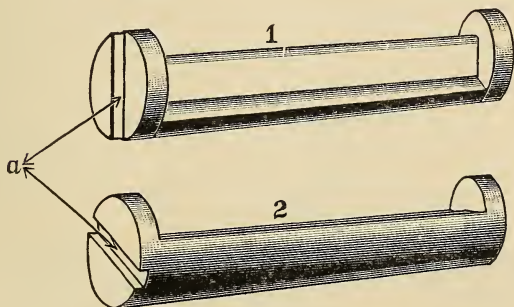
Corliss valves: 1, steam valve; 2, exhaust valve. The recesses *a*, cut across the face of the circular end of the valves, are to receive a T shaped head of the valve stems, which transfers the rotary motion of the latter to the valves, and still allows the valves to be withdrawn from their respective chambers by removing the covers on the front side of the engine. It also enables the valves to leave their seats, if forced by water or over pressure, and to follow up near without bending the valve stem.
